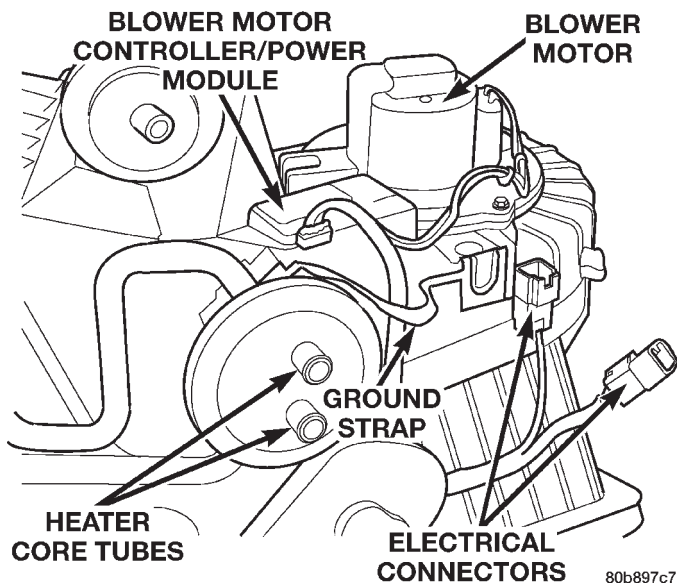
Blower Motor Resistor or Controller/Power Module Remove/Install
